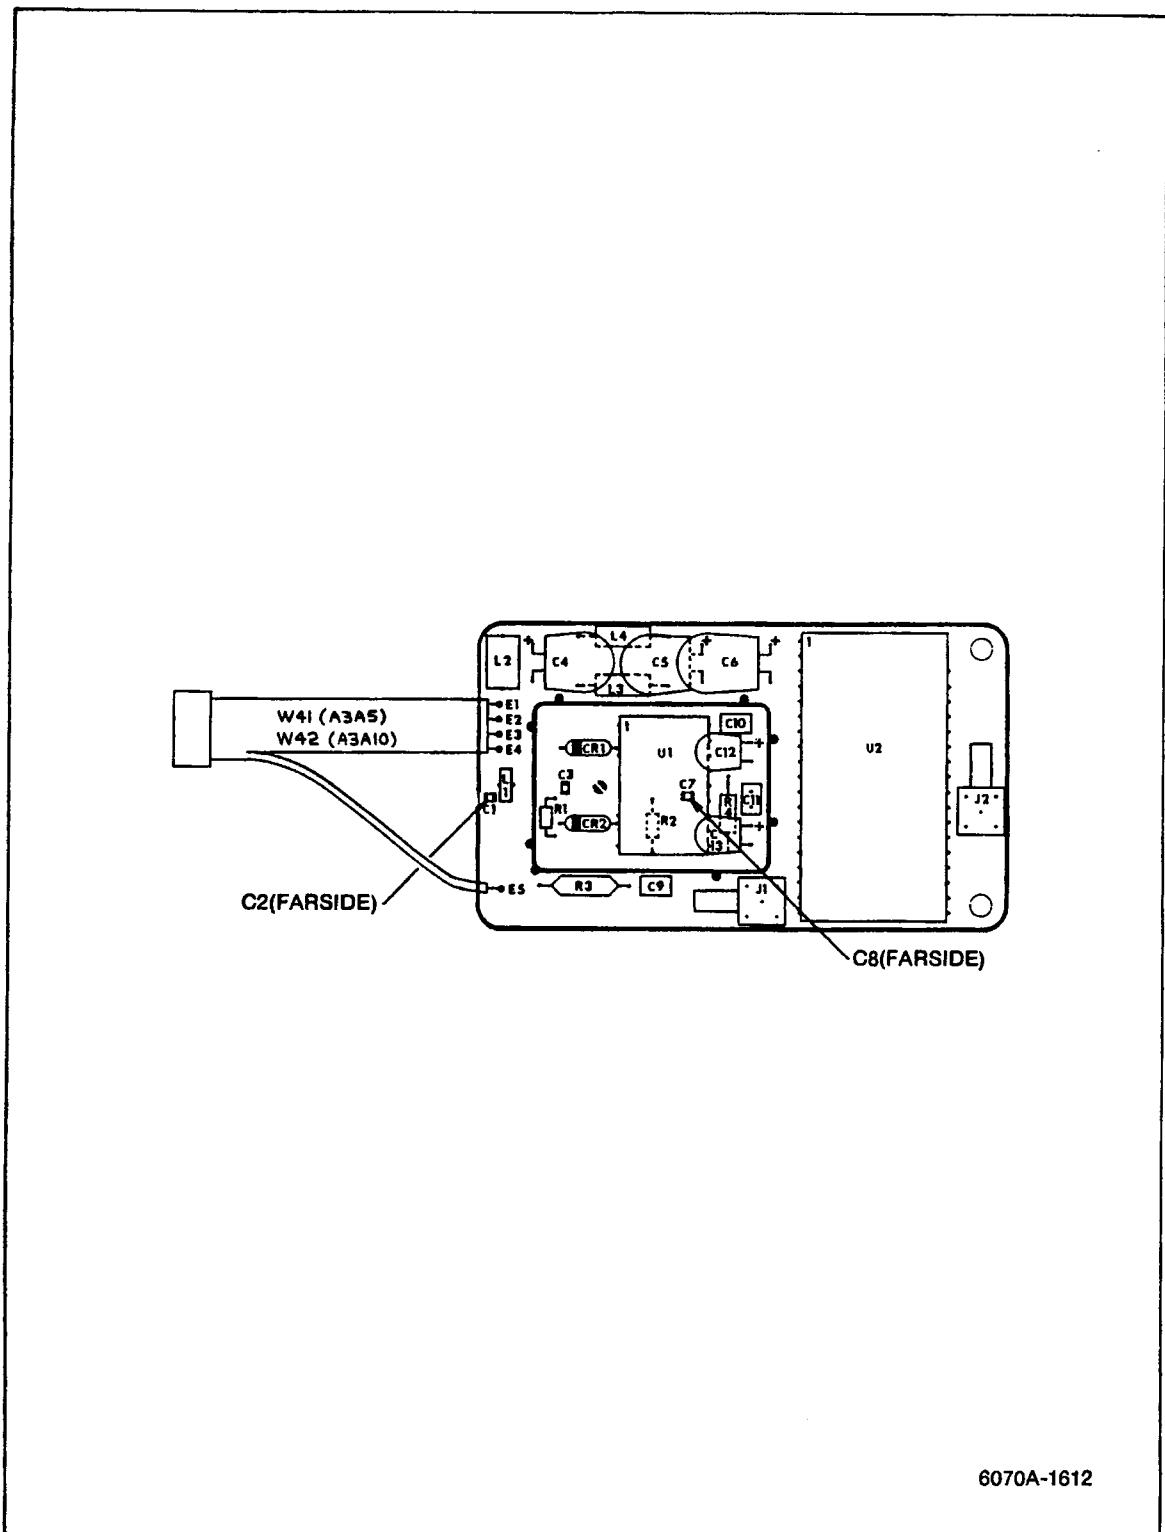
A3A5 VCO Resonator PCB Assembly
